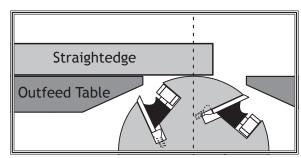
Adjusting outfeed table even with cutterhead body (knife-style cutterhead shown).
